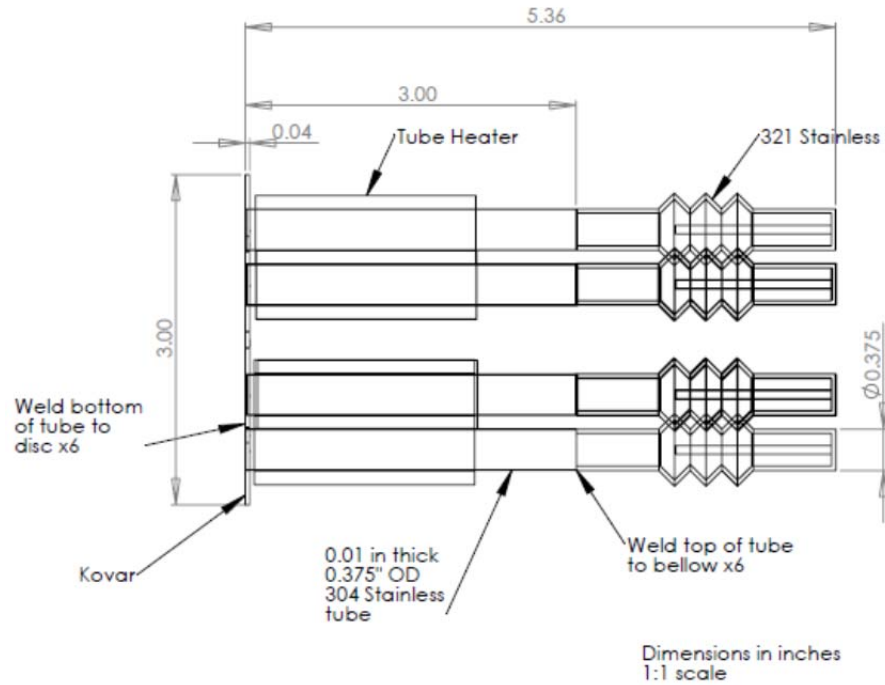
Welding diagram of print head attachment manifold. The machined Kovar® disc at the base is laser welded to stainless steel source tubes. The bead is run between the inner surface of the tube and the underside of the nozzle. Source tubes are laser welded to bellows at the opposite end. Bellows can be eliminated since the Swagelok UltraTorr® fittings used to seal tubes to the feedthrough accommodate thermal expansion of the source tube. Dimensions are in inches. Note error in drawing. The actual radius of the Kovar® disc is 4 inches.
